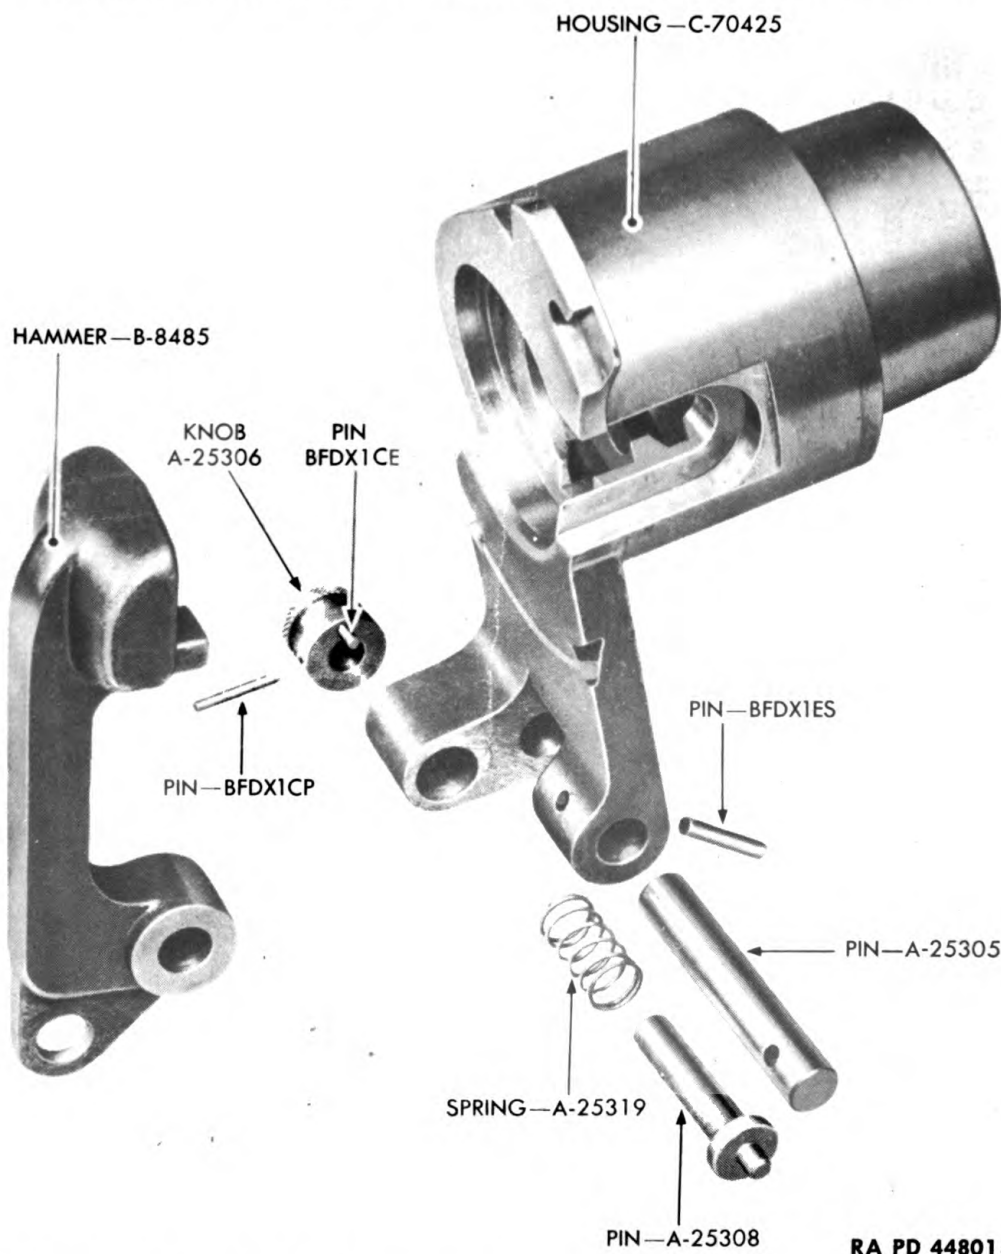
Firing Mechanism Receiver Housing—Exploded View
